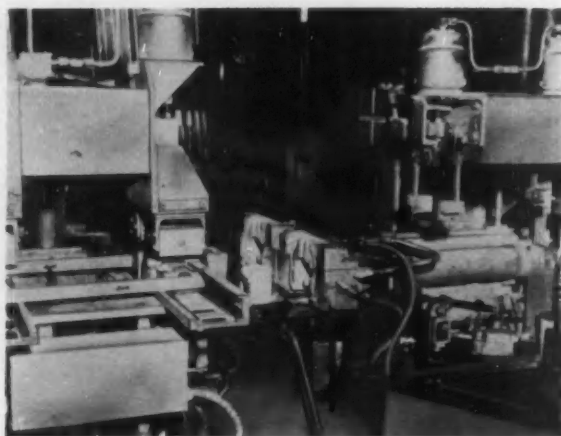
Two station piston molding machine with automatic core setter (left) and automatic unloader (right).
